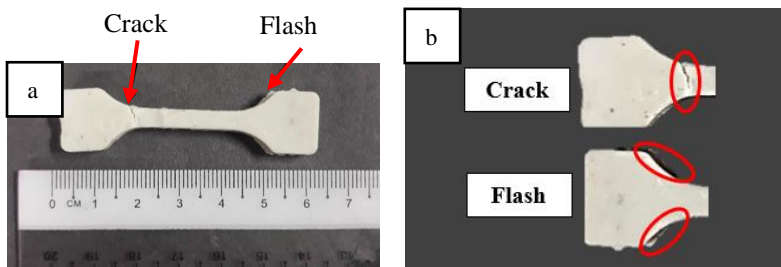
Injected part at 150 °C (a) Minor defects: crack and flash (b) Close-up on the defects
